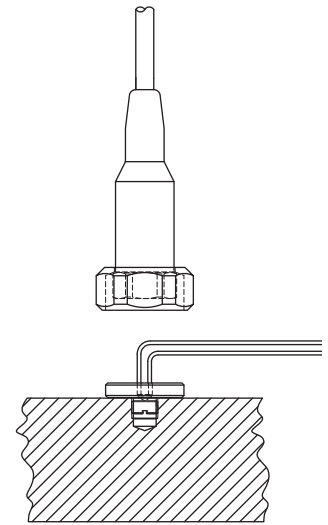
Upon removal, if mounting stud does not disengage from sensor, use a flat head screwdriver to hold stud, while turning hex nut counter-clockwise with a wrench.
